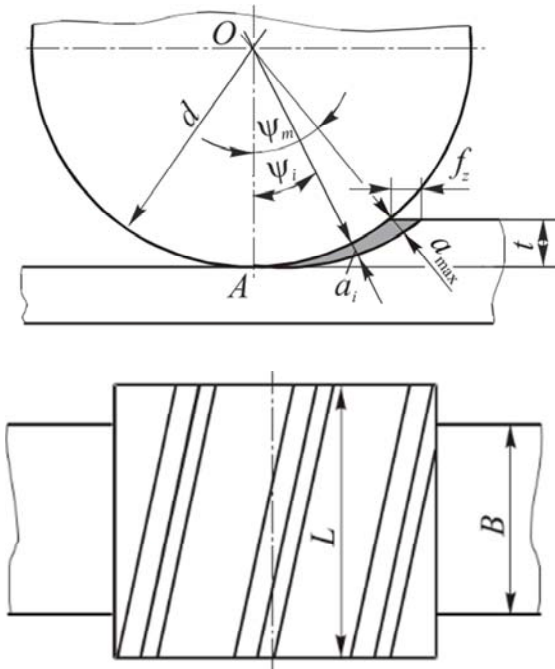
Dimensions of a layer being removed in plain milling:
